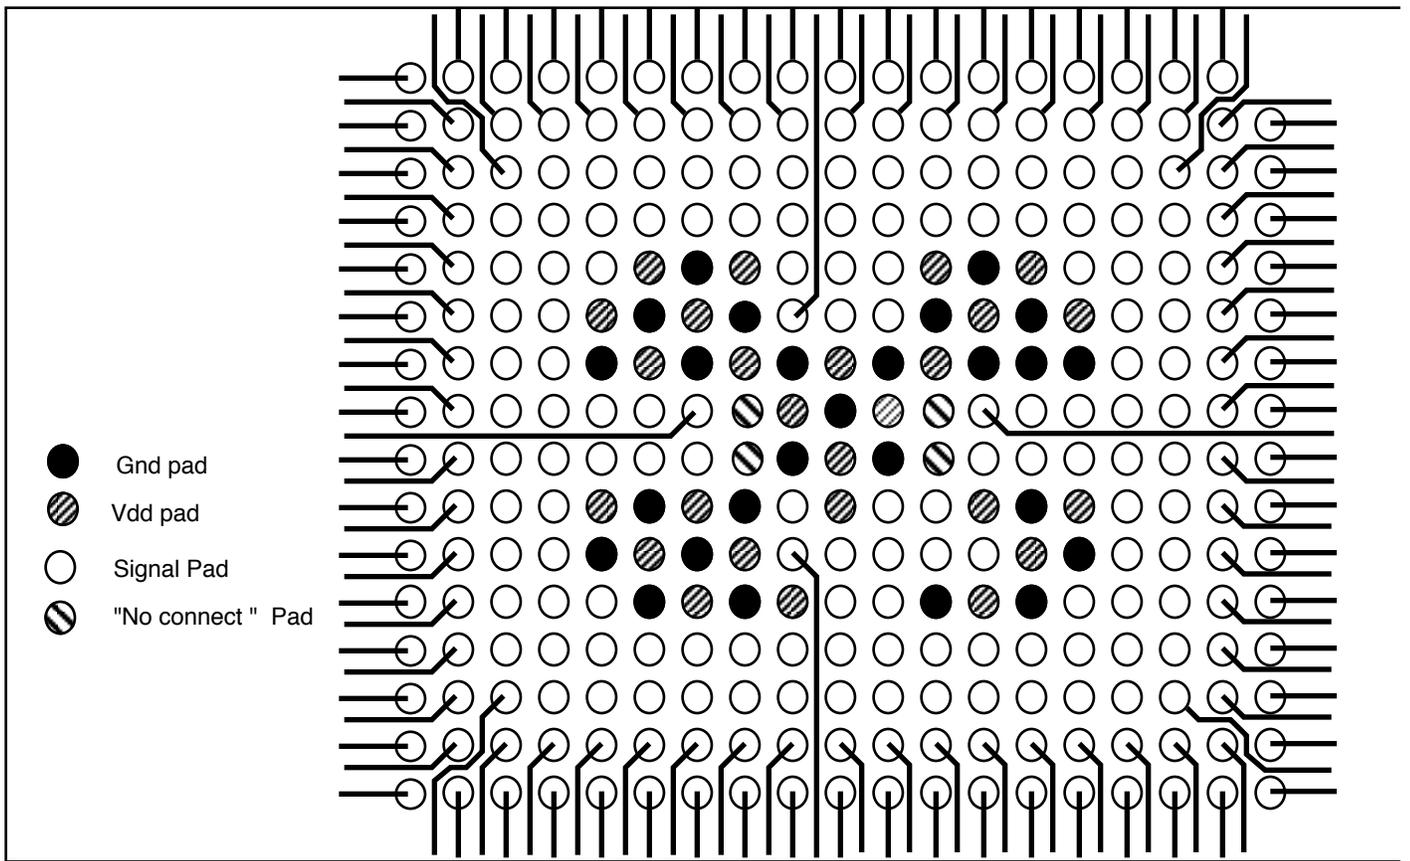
MPC105 Package Footprint and Top Layer Escape Pattern
